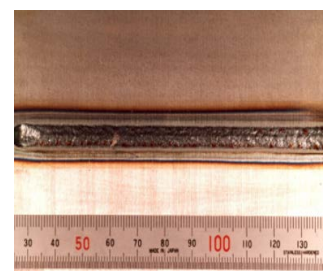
A cross-section of butt weld made using $P = 5$ kW, $S = 0.5$ m/min, $Dd = -0.5$ mm.
